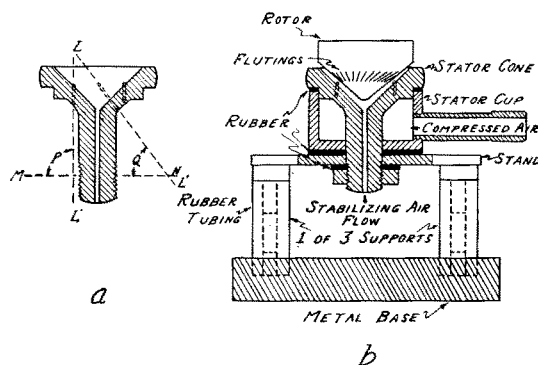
a*, Cross-sectional drawing of stator cone; *b*, cross-sectional drawing of stator and support with rotor in place.
